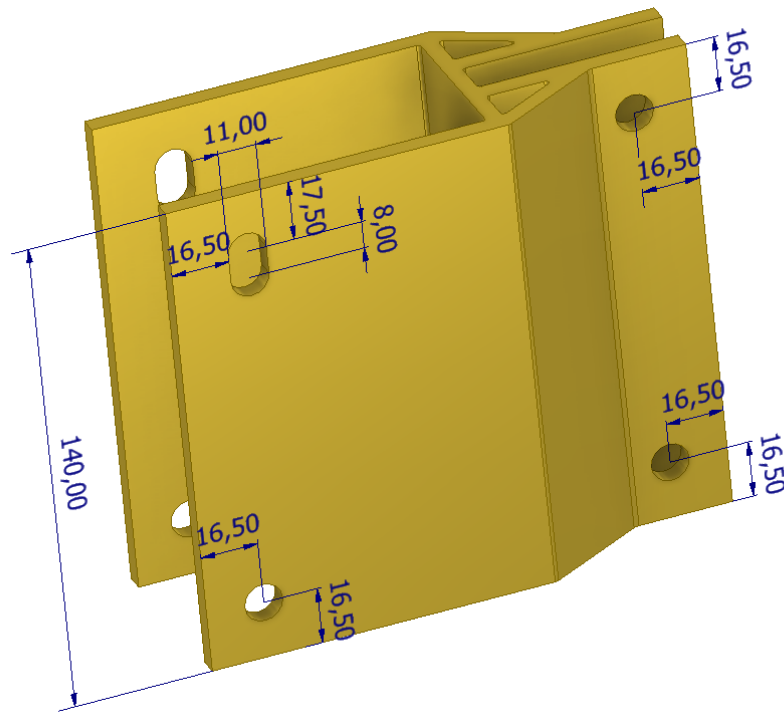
Bolt hole placement and extrusion length for large custom self-weight + wind profile. All bolts size M10. Dimensions in mm.
